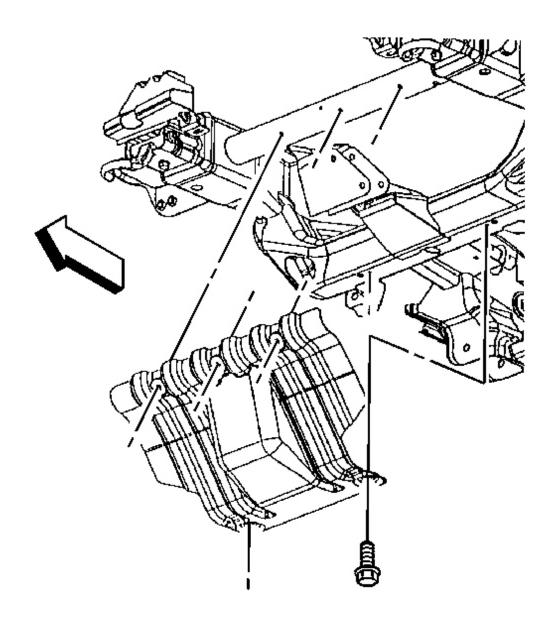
View Of Engine Protection Shield Courtesy of GENERAL MOTORS CORP.
